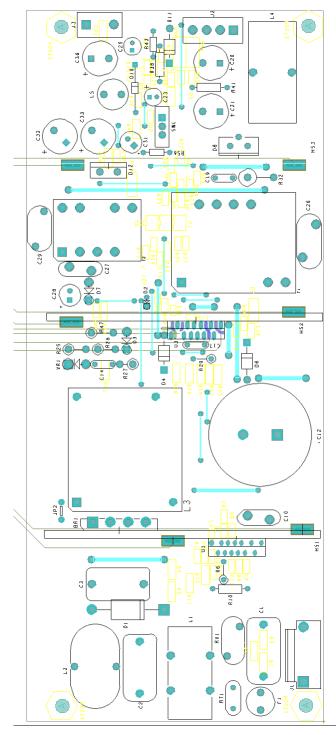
Printed Circuit Layout, Showing Top Side Components with Bottom Side Traces.
